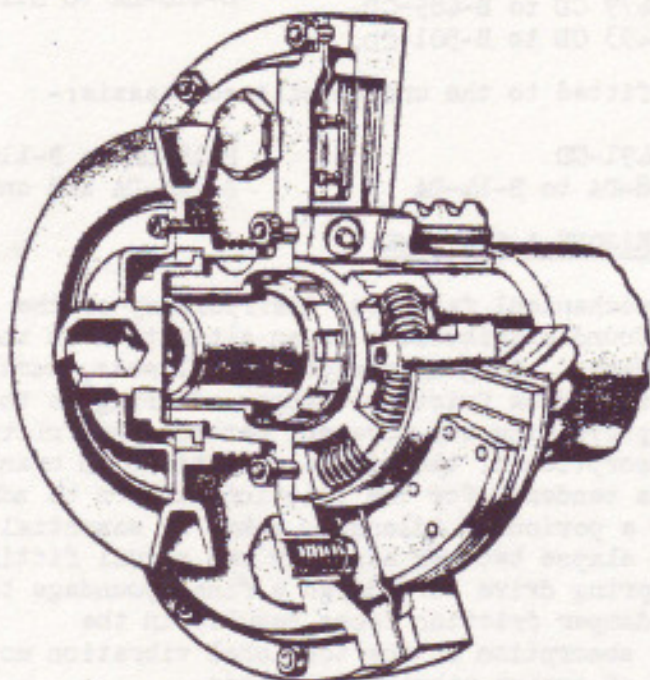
"CUT-AWAY" VIEW - SPRING DRIVE
